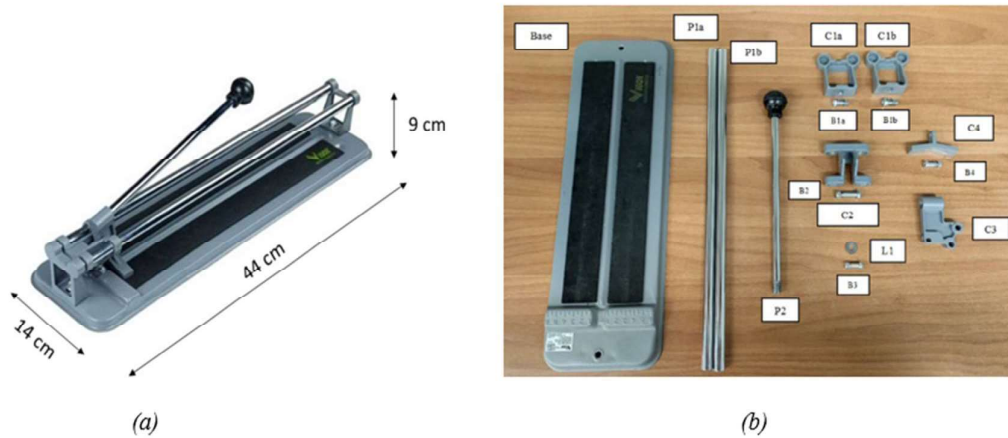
The assembled tile cutter and its main dimensions (a) and all the parts and screws composing it (b) (Gervasi *et al.*, 2024)
